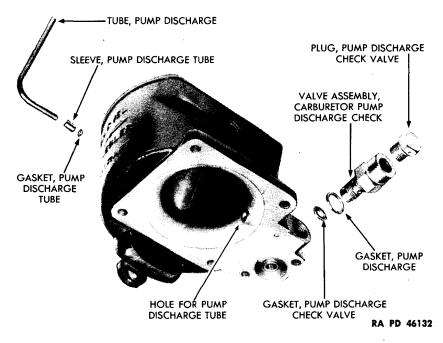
Pump Discharge Tube and Check Valve, Disassembled
